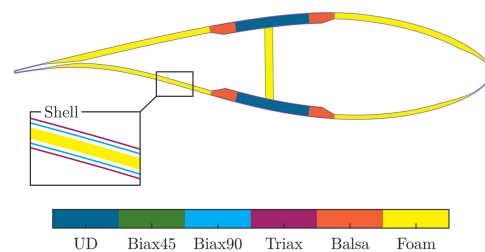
Schematic blade cross-sectional view at a radial position of $r = 12 \text{ m}$ with a detailed explosion drawing of the shell.
